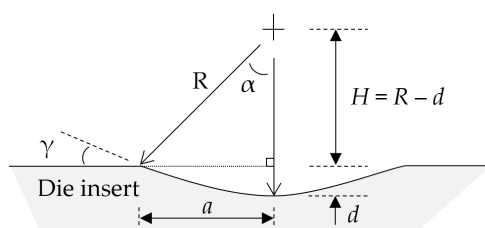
Selection of milling tool based on lubricant pocket geometry.
